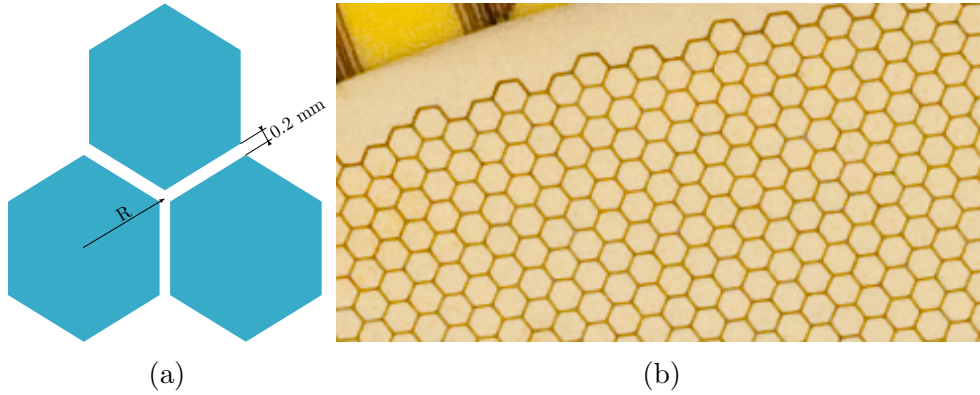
(a) Geometry of the pads indicating the radius and the distance between two pads. (b) Closeup view of the pad-plane.
